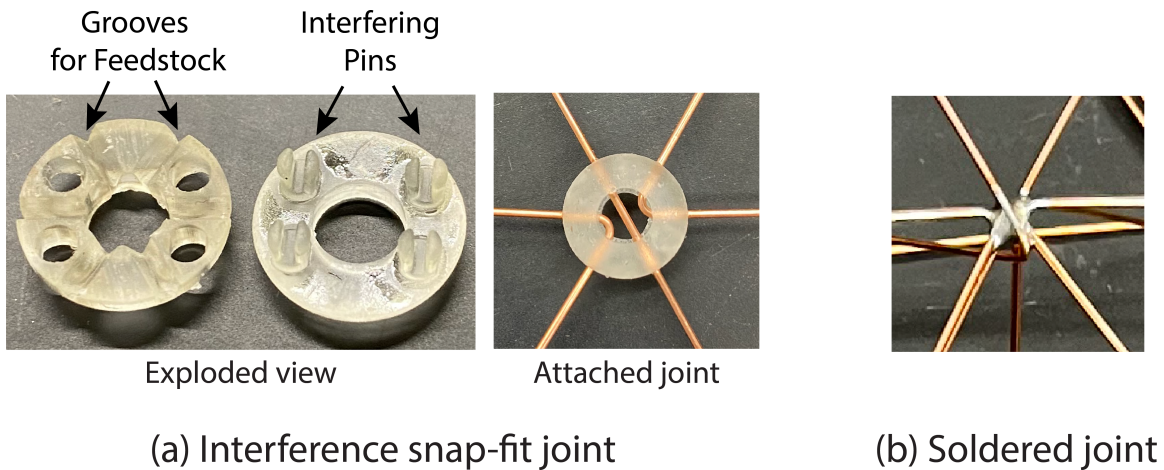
Examples of low-power joining methods compatible with Bend-Forming: (a) snap-fit joints which rely on interference and (b) soldered joints. Here the snap-fit joints are made of plastic and 3D printed using a stereolithography (SLA) printer [84].
